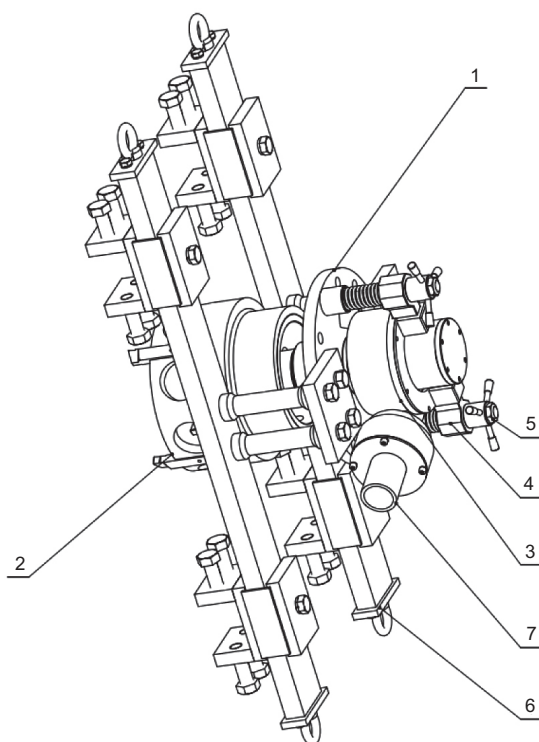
Milling machine construction: 1 – main plate with mandrel and threaded sleeve; 2 – milling head – depending on the chosen option: • for groove $\varnothing 178$ –154 for seal $\varnothing 176/\varnothing 156$, • for groove $\varnothing 220$ –196 for seal $\varnothing 218/\varnothing 198$, • for groove $\varnothing 246$ –222 for seal $\varnothing 244/\varnothing 224$ L = 190/120, • for groove $\varnothing 246$ –222 for seal $\varnothing 244/\varnothing 224$ L = 250/180; 3 – worm gear; 4 – hub with guides and mounting device, 5 – mounting to main plate device, 6 – guides with mounting – depending on the chosen option: • round for mounting milling machine with handles, • rectangular for mounting the milling machine with handles; 7 – planetary gear with driving system housing
